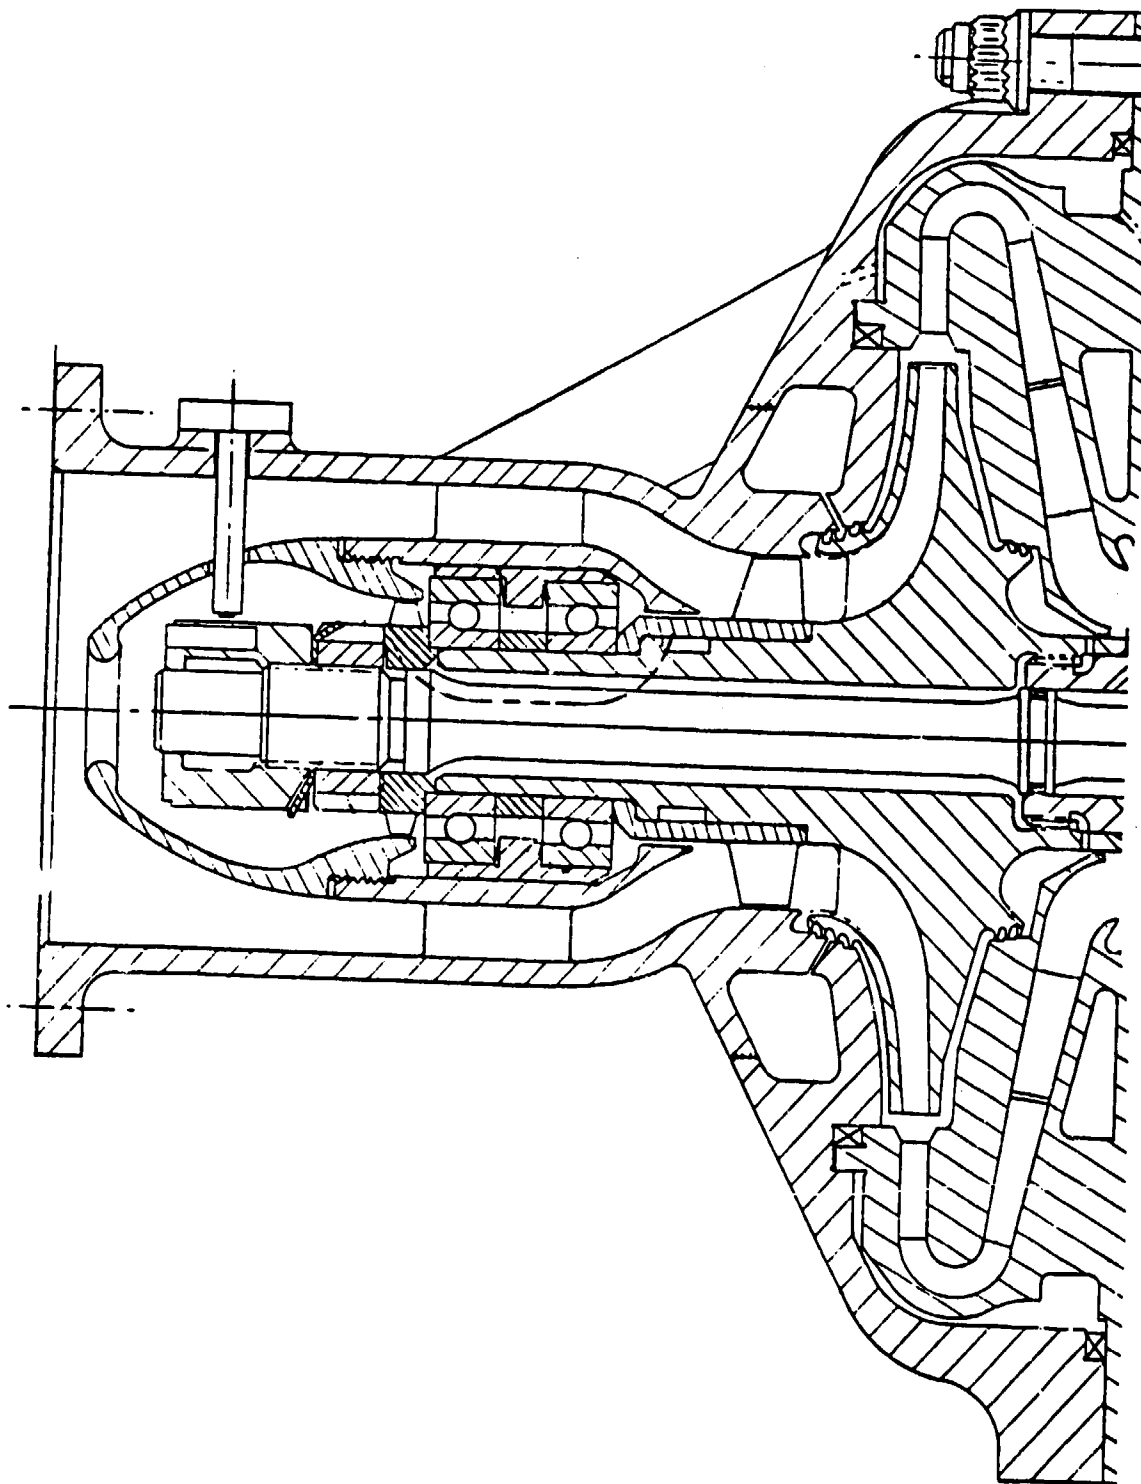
Design Modification No. 16 (Features: Axial Entry Inlet, Inducer, Impeller Modifications)
